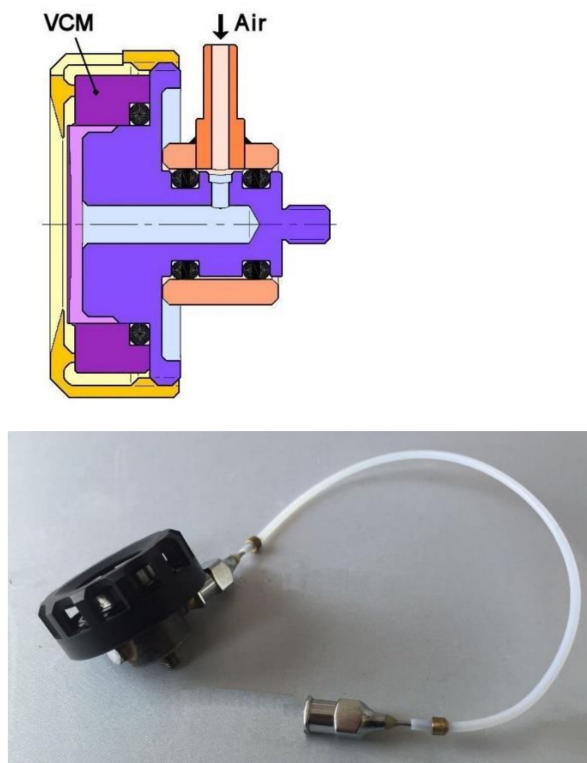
(Up): Schematic sectional drawing of a cycloid-like VCM assembly. (Down): View of a VCM assembly mounted in air pipe loading unit for installation at the VLTI translation carriage of recombination tunnel.
